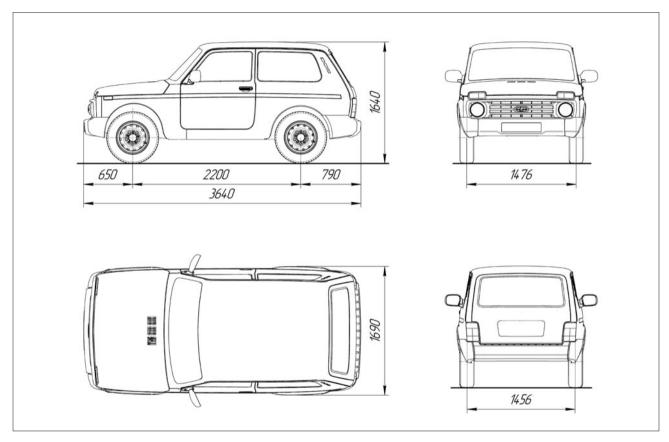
Exterior dimensions for LADA 4x4 Urban
